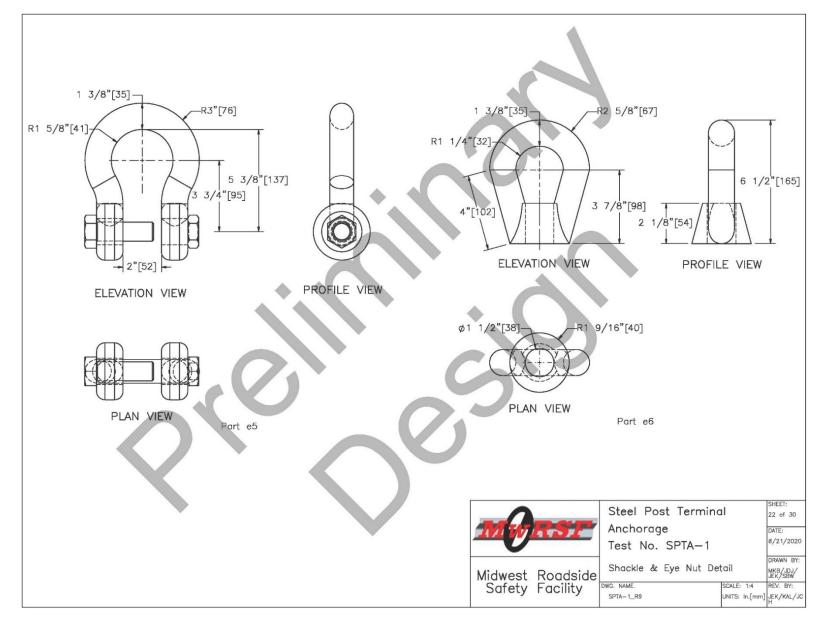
Shackle and Eye Nut Detail, Test No. SPTA-1
